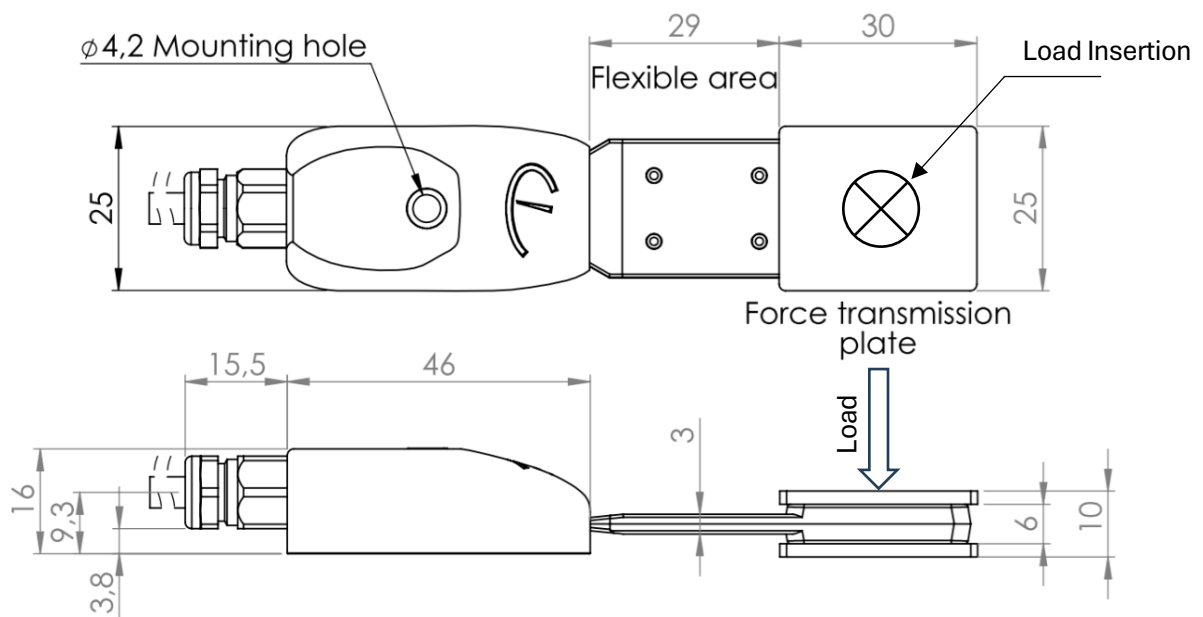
Drawing of Sensor 5M8C & 5BEC - Cabled version
